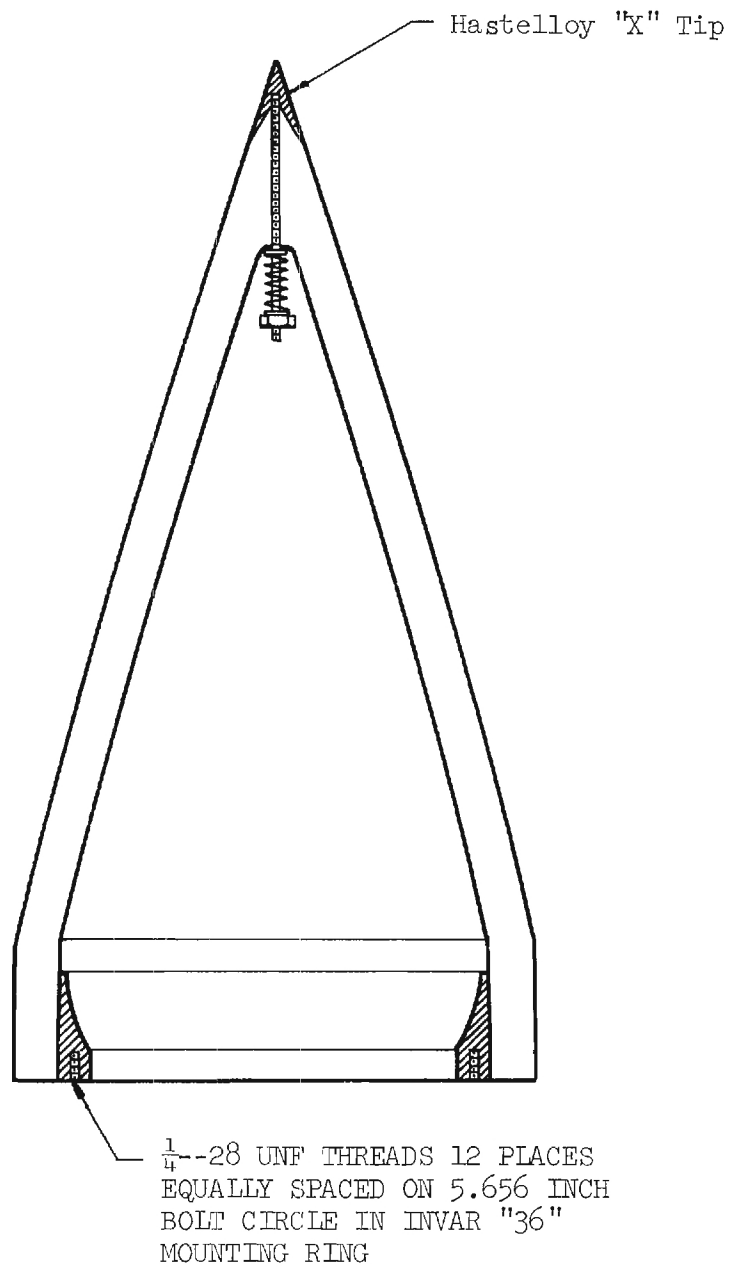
Radome Assembly Showing Tip and Attachment Design.
